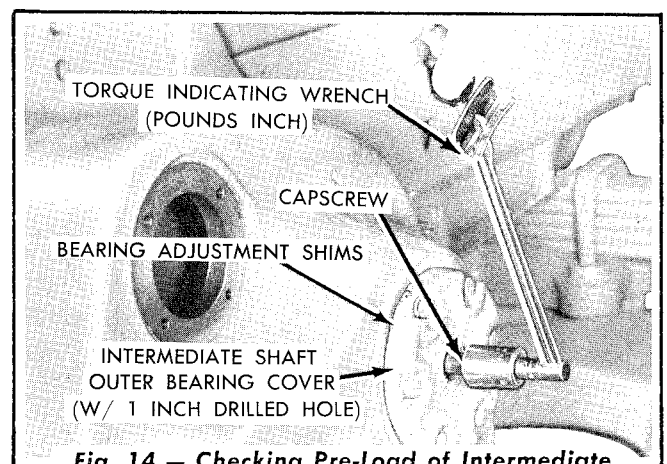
Checking Pre-Load of Intermediate Shaft Bearings
